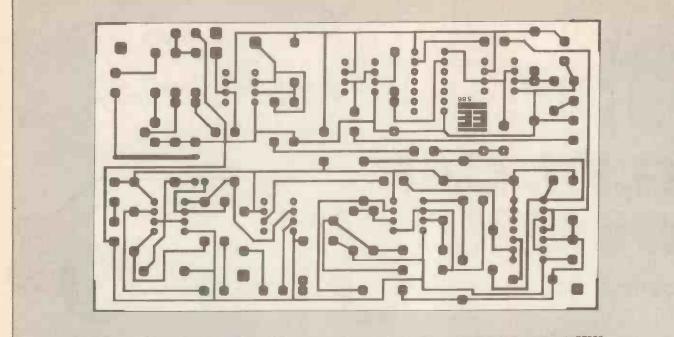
Full size printed circuit board master foil pattern. This board is available from the EE PCB Service, code EE586.
